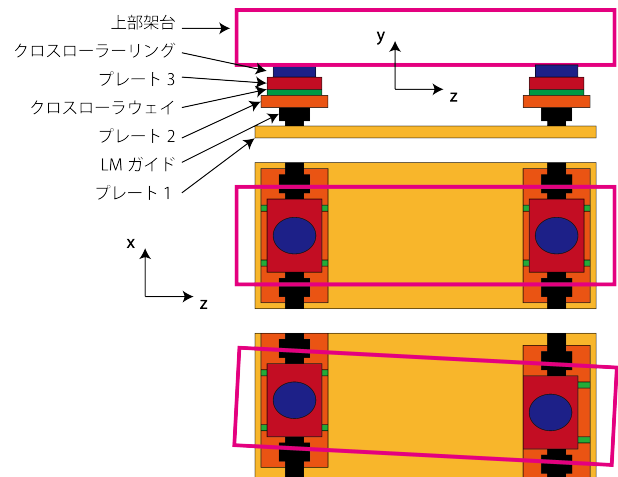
Schematic view of adjustment mechanism for yaw motion.
